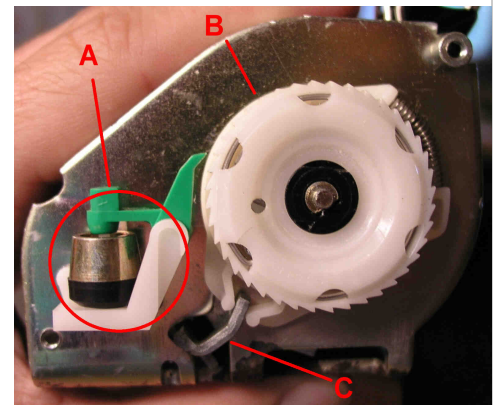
The inertia reel mechanism assembled, Starlock fastener removed. A) - The crash sensor, shown in its neutral position. B) - The outer toothed wheel. C) - The locking pawl in its lowered (unlocked) position
